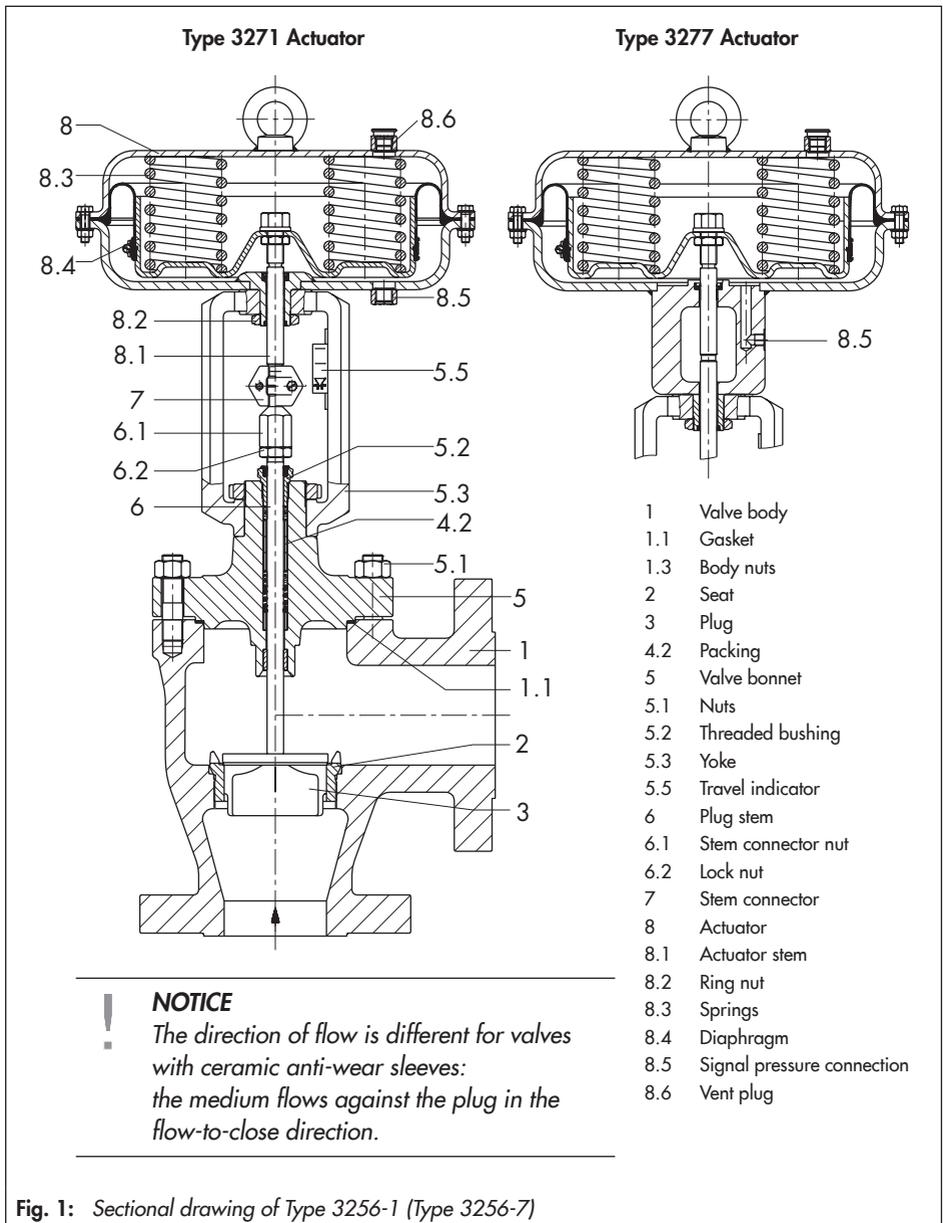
Sectional drawing of Type 3256-1 (Type 3256-7)
